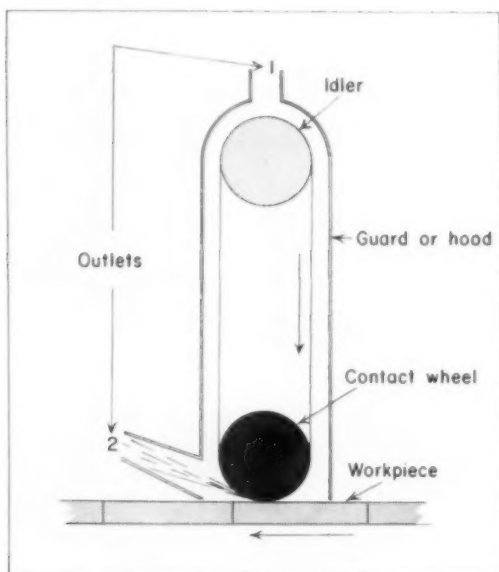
Enclosed hoods for dust collection should have two outlets. Fans should be adequately sized for satisfactory dust removal.
